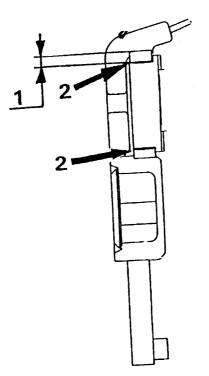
Idle Wheel Guides1. Minimum thickness 16 mm.2. Guides
